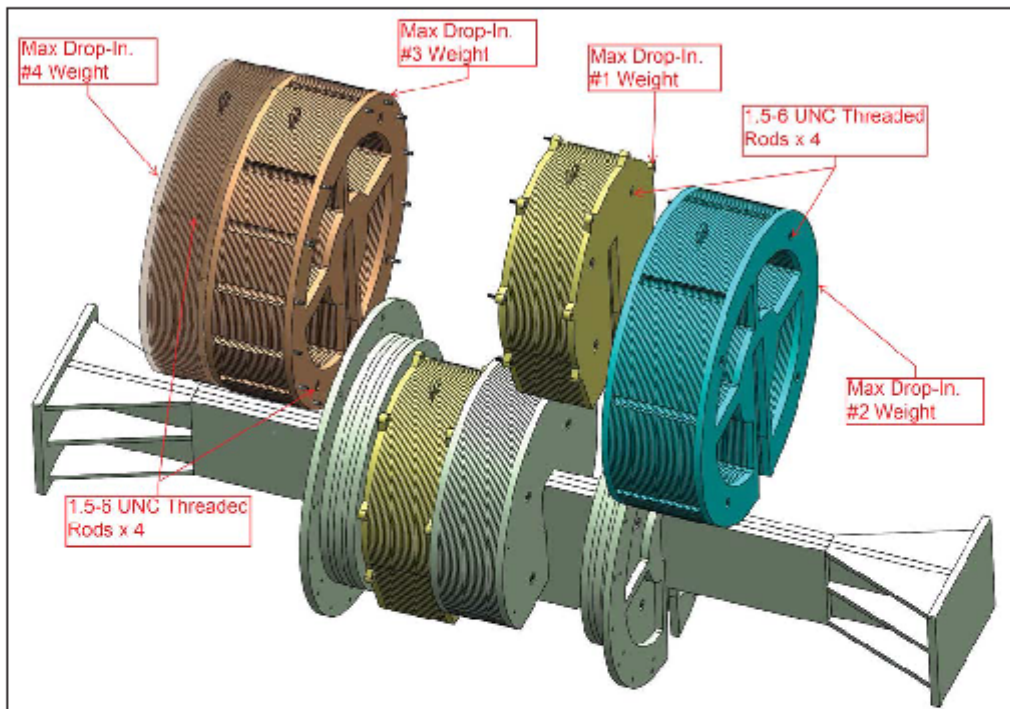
Maximum Condition Test Load Drop-in Load Connections
